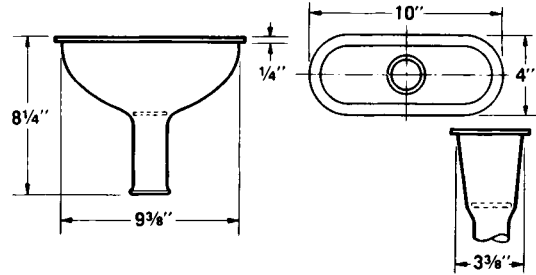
Beaded Outlet 3- by 9-in. Oval
